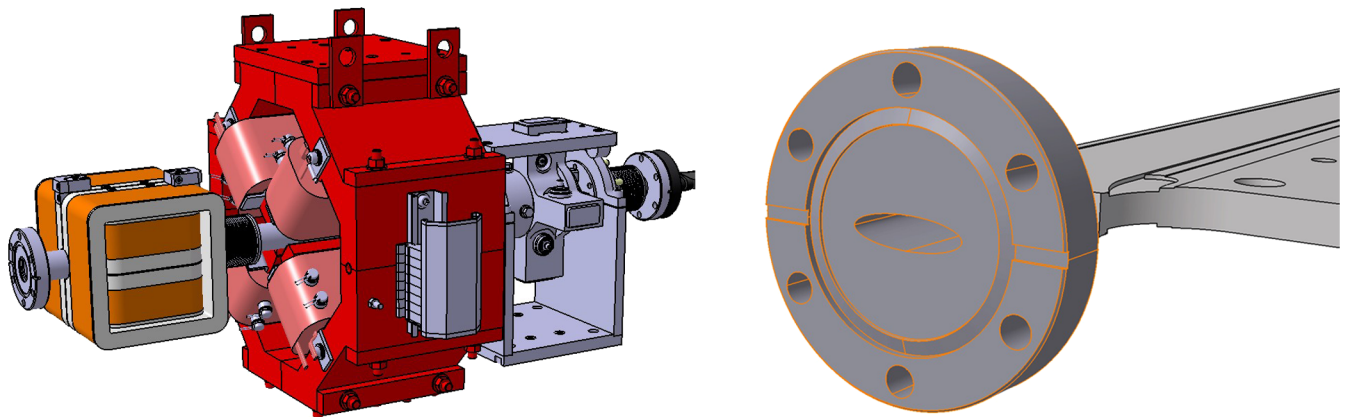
3D rendering of the cylindrical stainless steel 304LN, 1.1-m-long vacuum chamber of the interundulator section (left) and of the elliptical aluminum 3.2-m-long undulator vacuum chamber (right). The inner chamber dimensions are, respectively, 22 mm diameter and 7 mm \times 22 mm inner diameter. The cylindrical pipe is surrounded by steering coils, a quadrupole magnet, and a cavity beam position monitor.
